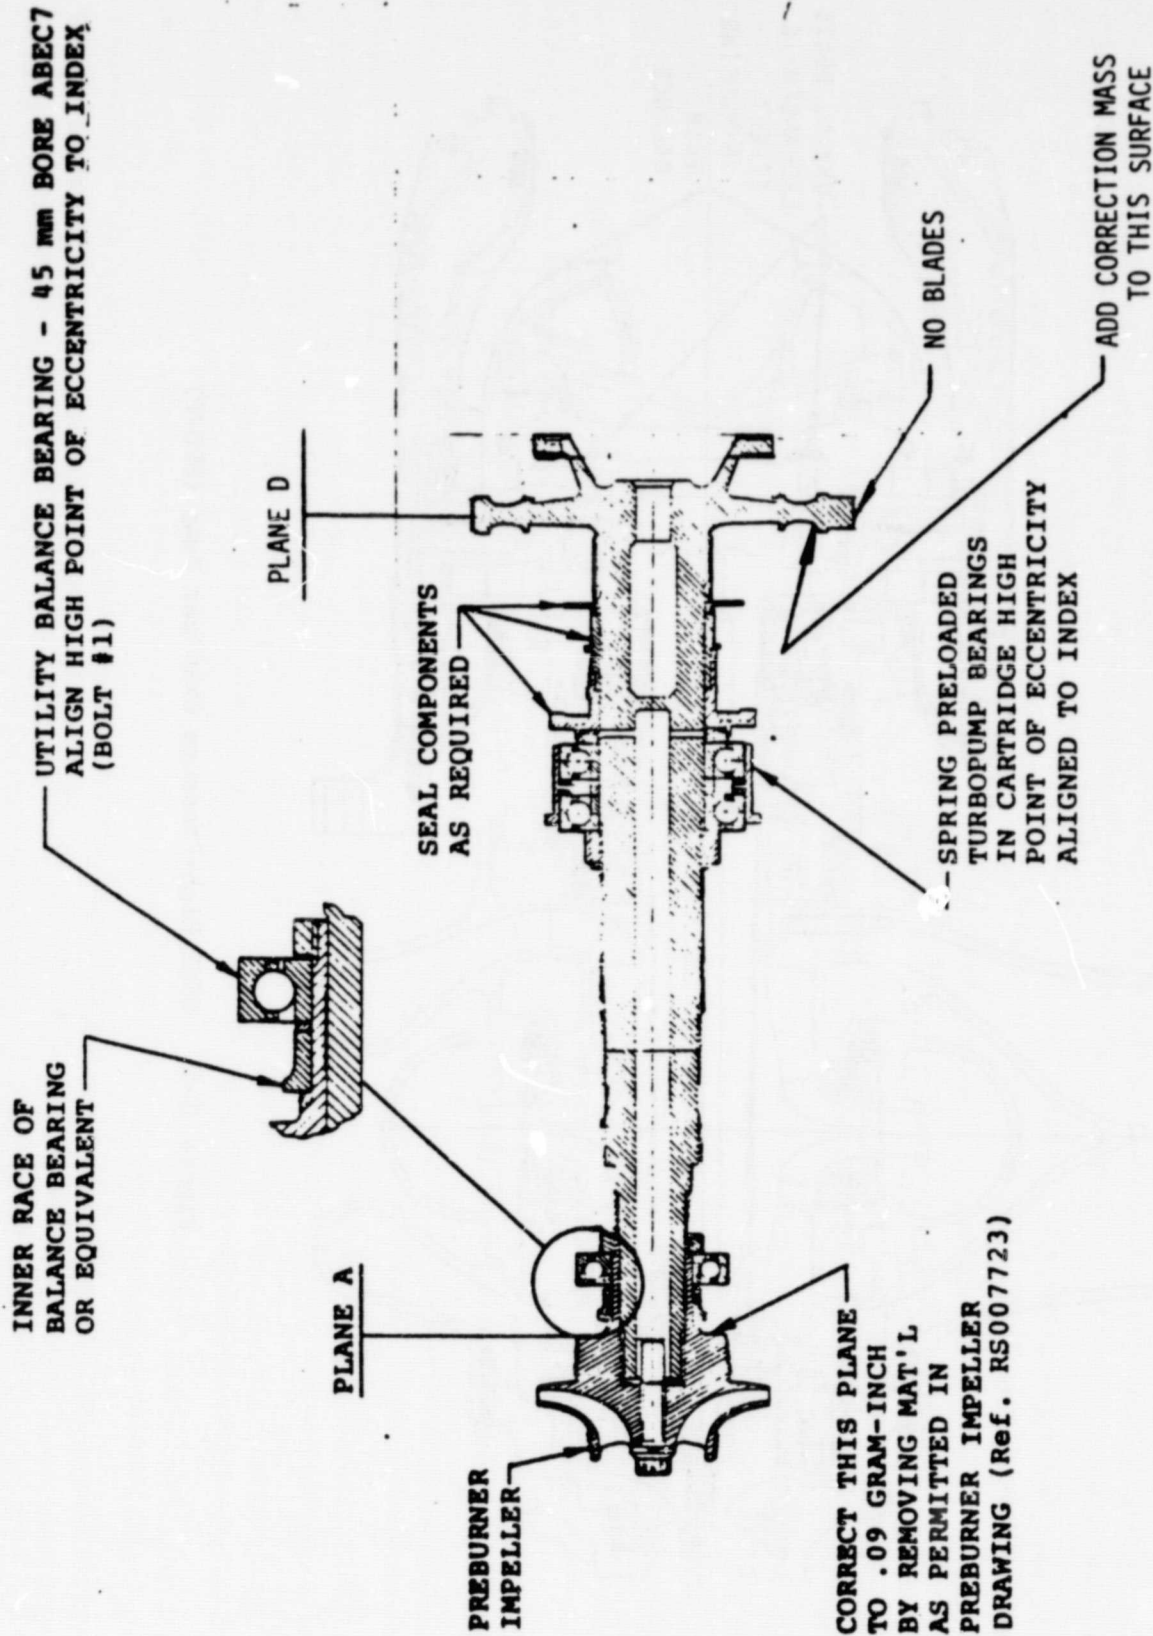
HPOTP Turbine/Preburner Balance Assembly
